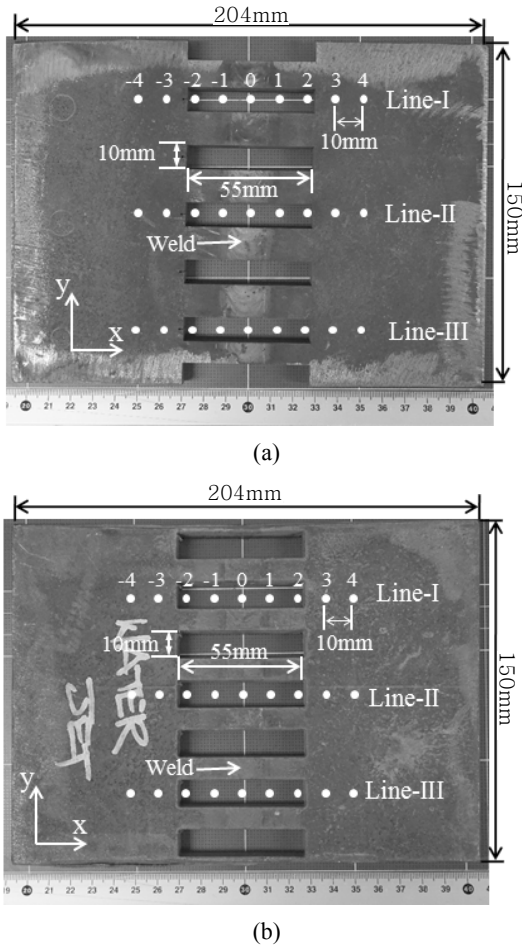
The welded plate of the wire cutting and waterjet
